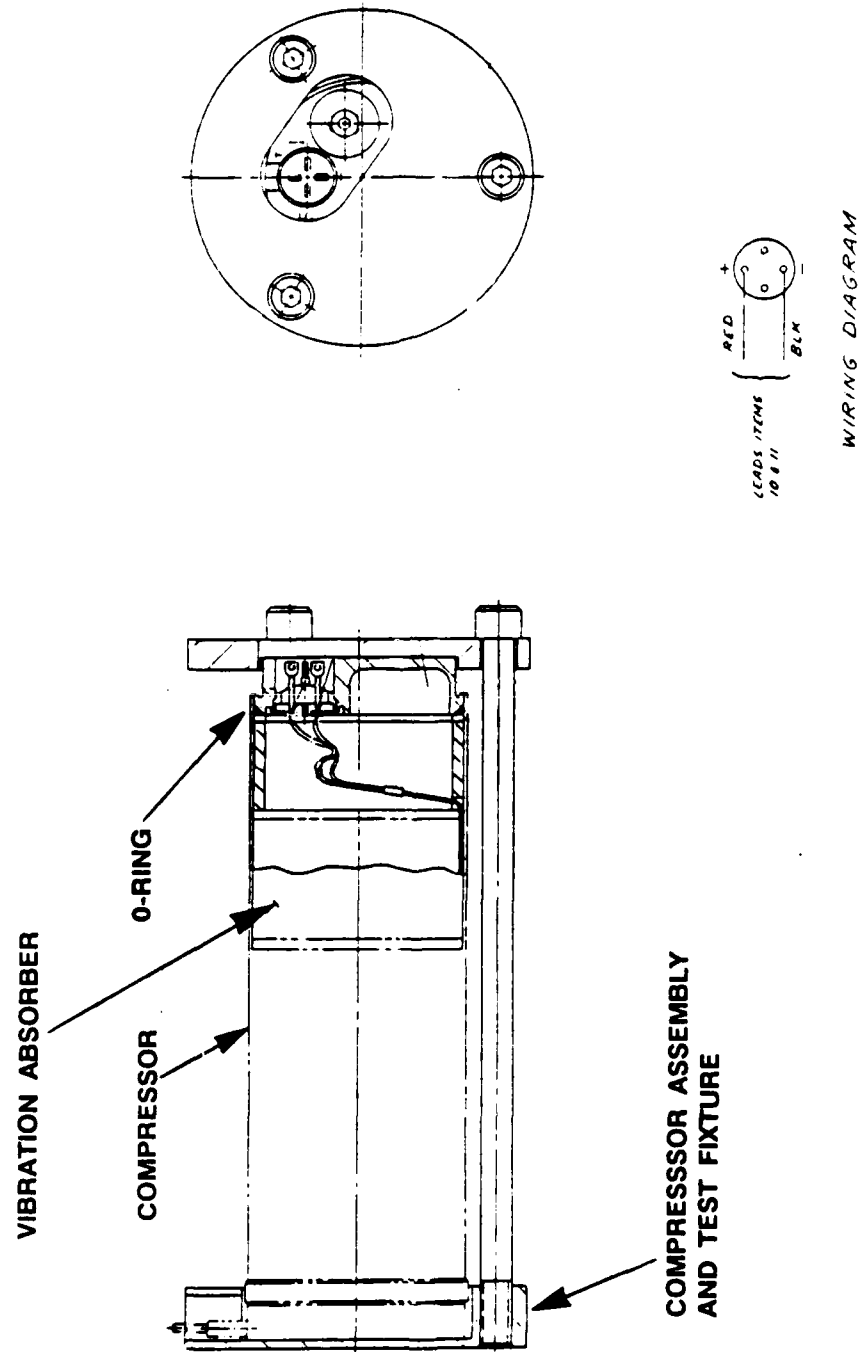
Compressor Mounted in Test Fixture for Run-in and Performance Tests
